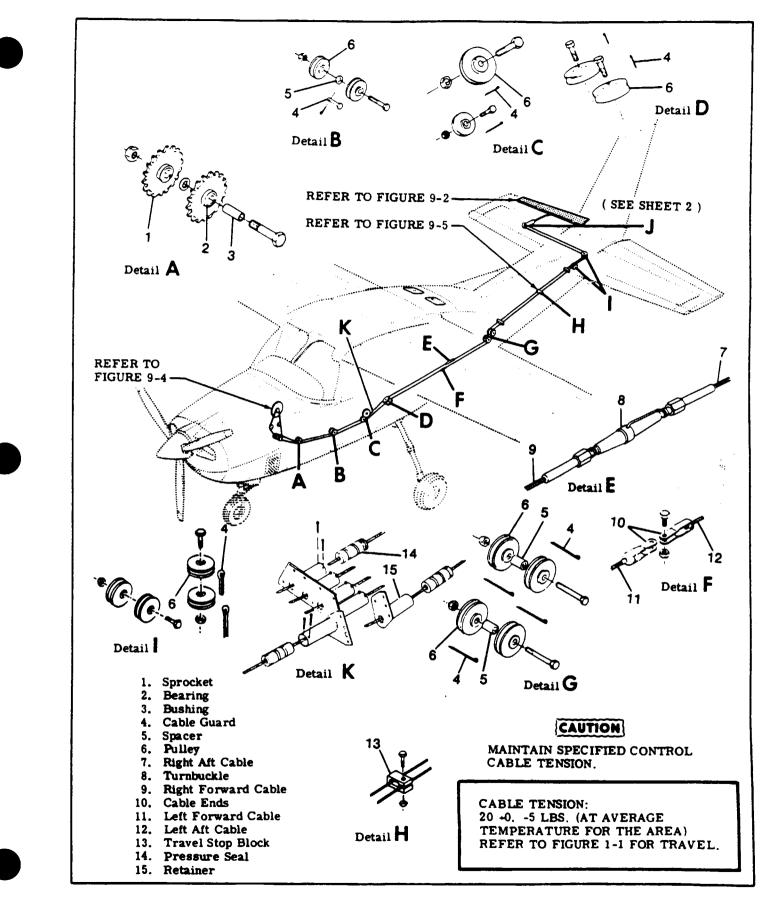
Elevator Trim Tab Control System (Sheet 1 of 2)
